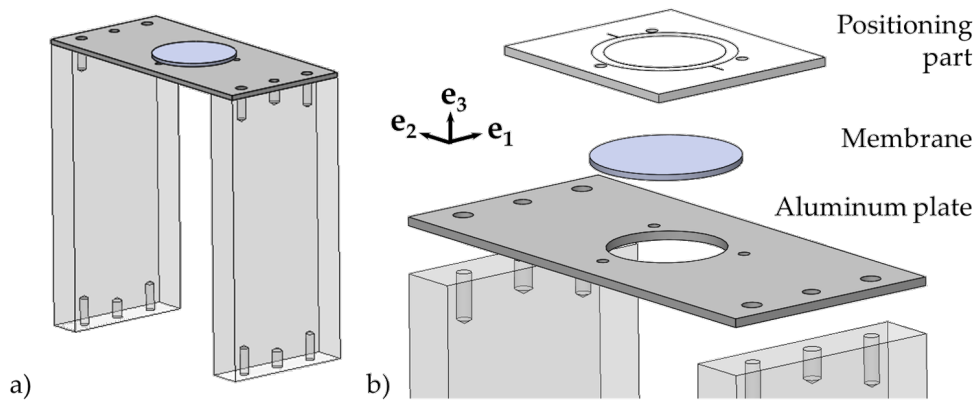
Mechanical support of the membrane in the experimental setup: Full view (a) and zoom on the exploded view of several components (b).
